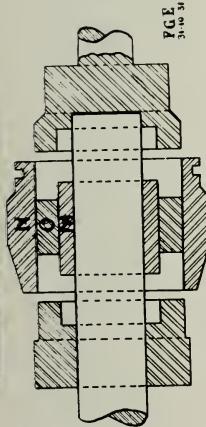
Free-wheel Unit on Mainshaft between High and Second Speed Gears.
